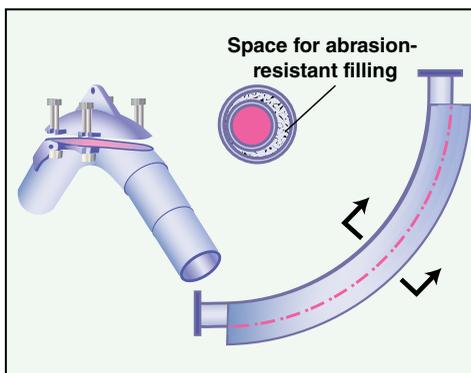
A wearback elbow design can either be a replaceable hardened piece or a wearable inner core with abrasion-resistant filling
